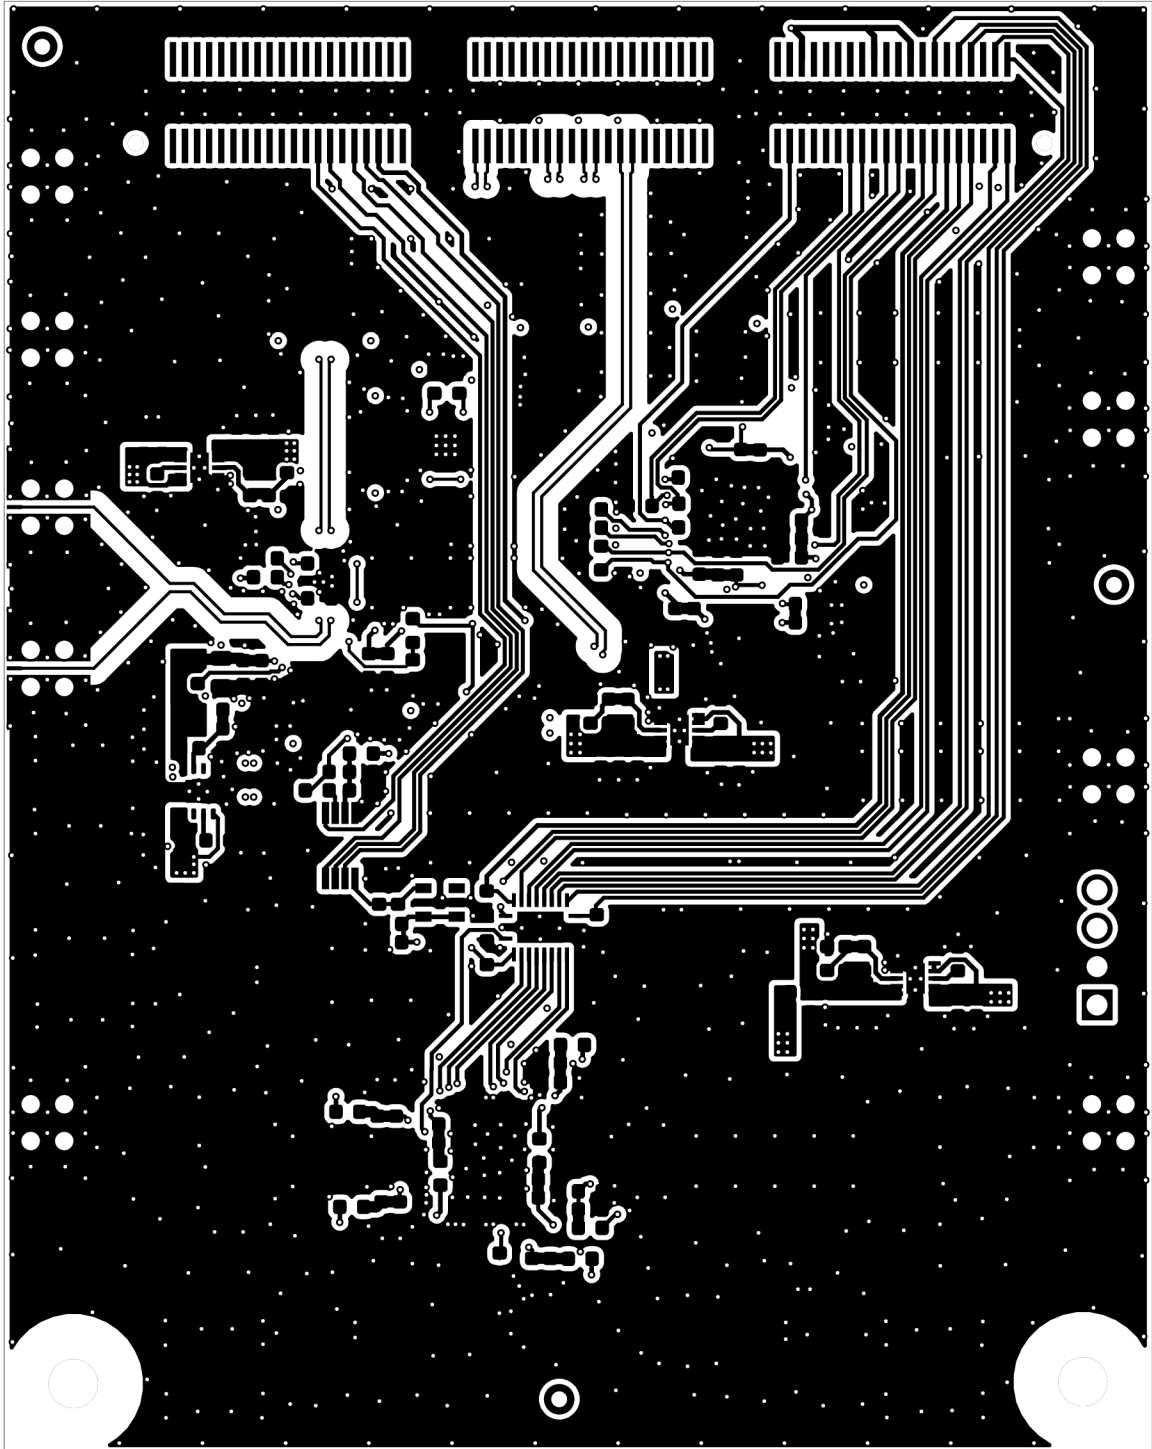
Bottom layer of the PCB (scale 2:1).
